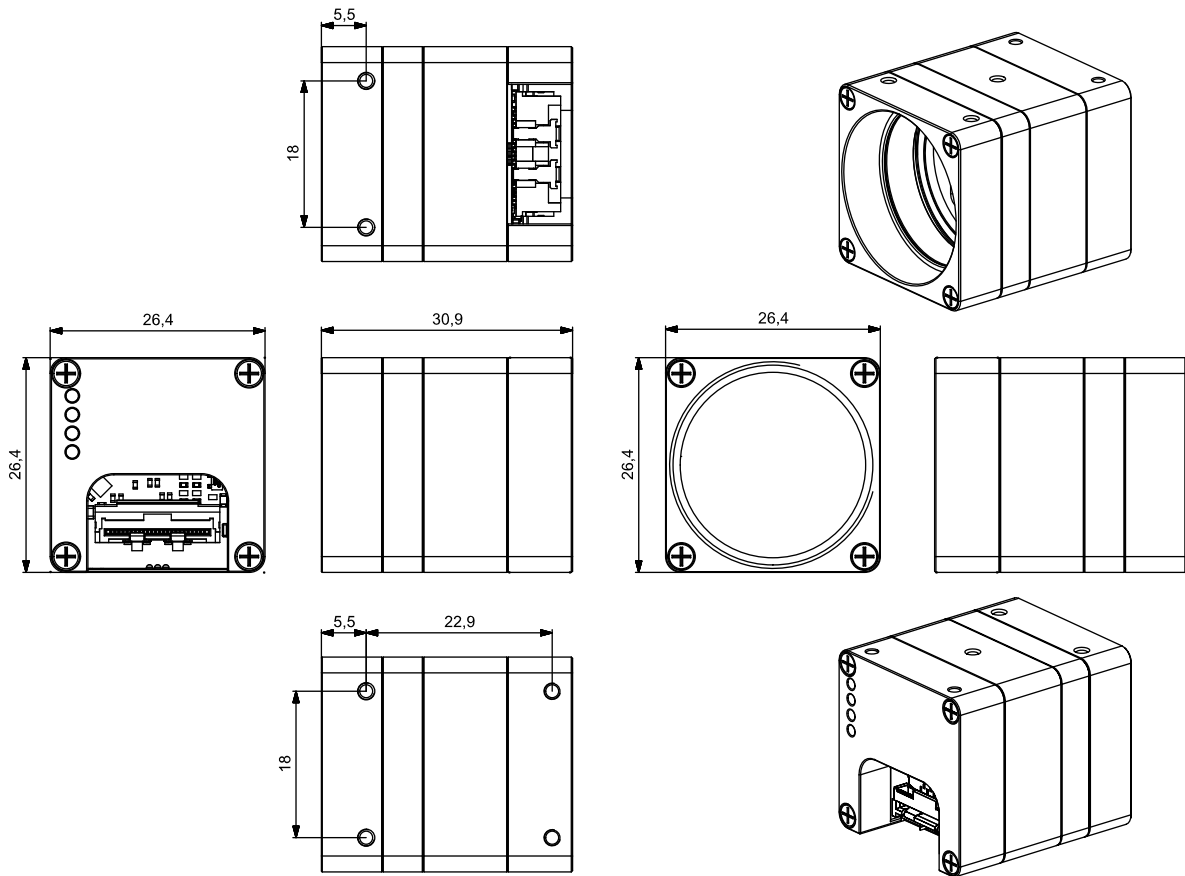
Dimensional drawing of MX089/124xG-SY-X2G2-FV (C-mount (with C-mount module B))
